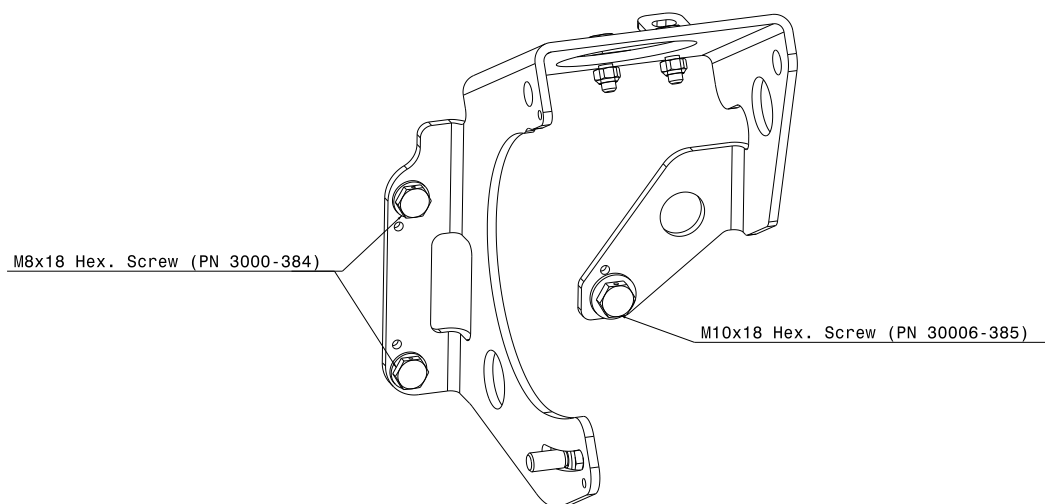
Isometric view Mounting Frame 20A 912iS
